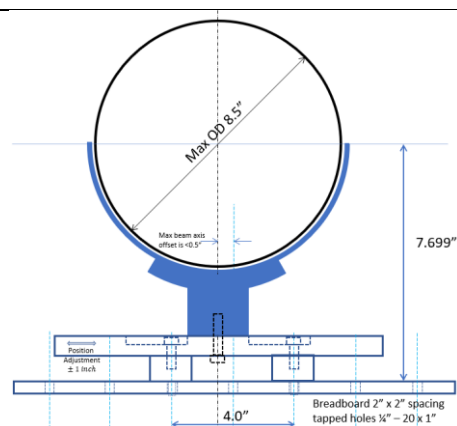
Magnet tube kinematic supports mounted on the breadboard inside the vacuum neutron guide. Width of the supports is 2.0 inches (along the beam axis).
